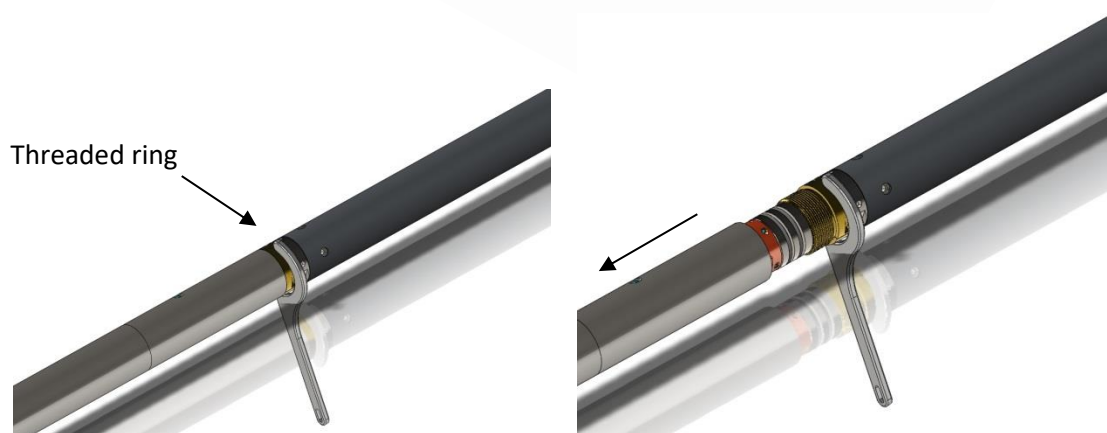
Unscrewing the threaded ring and removing the bottom plug
